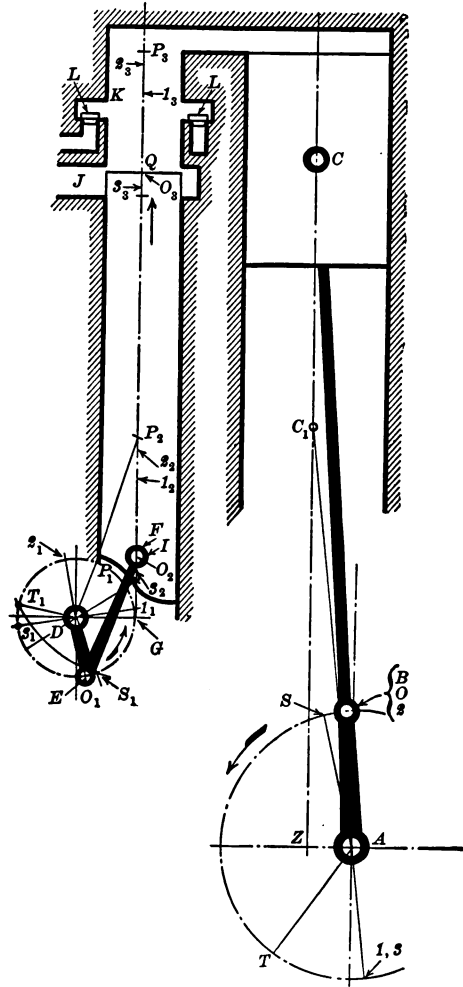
GASOLINE ENGINE OPERATED BY SINGLE PISTON VALVE AND ECCENTRIC
